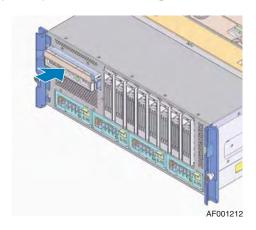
Installing the Front Control Panel and Optical Drive Assembly
